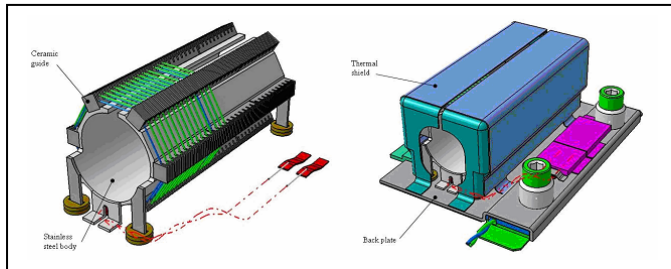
ITER original pick-up coil assembly: the detailed view (left), showing the stainless steel body, the ceramic grooving used to guide the wire and the winding pack, and the overall assembly (right), showing the thermal shield, the back plate attachment and coil-cable connector unit.
